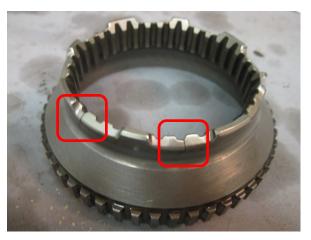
CRACKED PROPELLER SHAFT COUPLER
